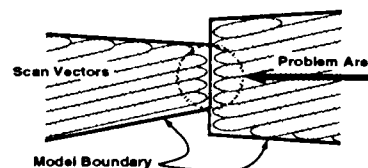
Internal walls cause structural discontinuities that can lead to excessive shrinkage.
